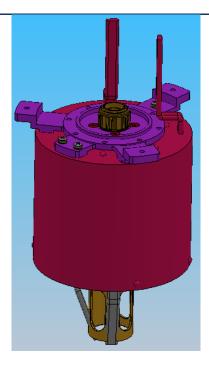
Slip-Ring/Rotary-Joint Assembly for OceanTRx $^{\text{TM}}$ 7-300
